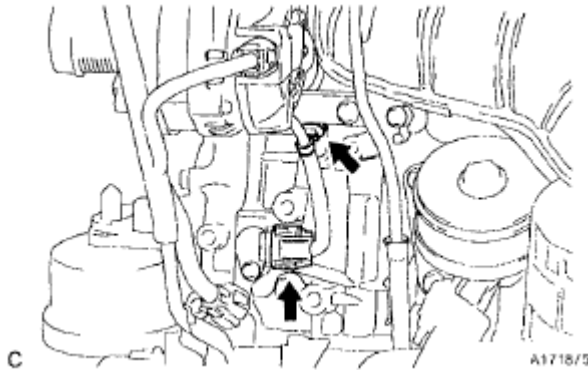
Locating Crankshaft Position Sensor Connector And Clamp
